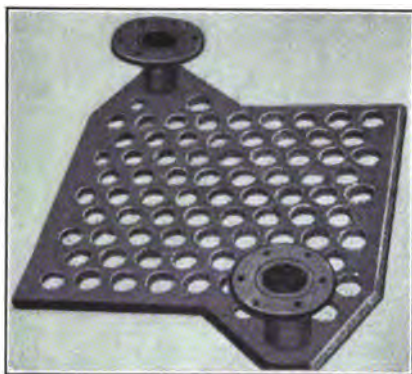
Tube sheet of superheater with autogenously welded pipe connections.
